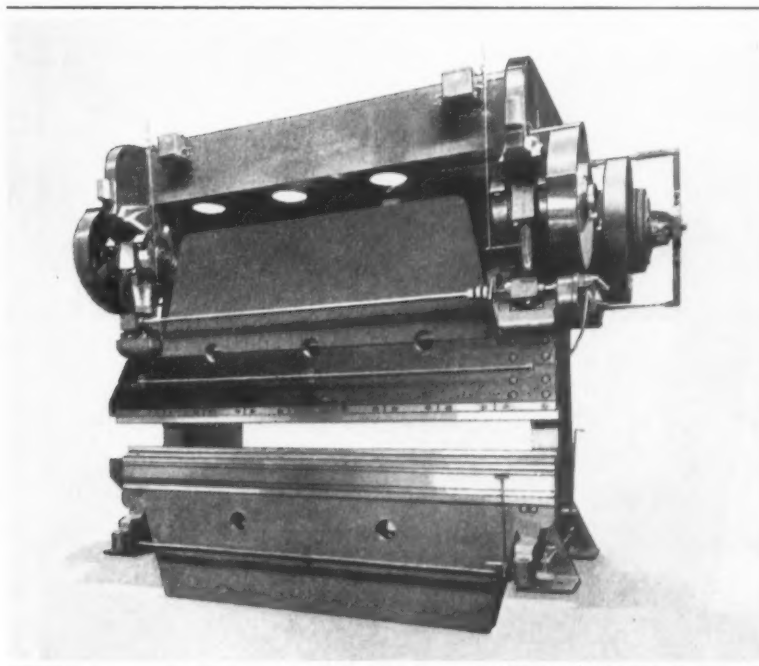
Press Brake Constructed so that Either Side of the Ram can be Raised or Lowered Independently
